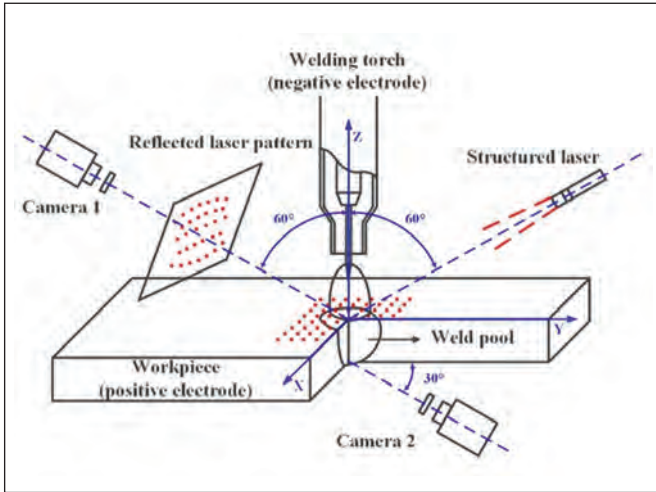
Experimental setup of the weld pool and weld joint penetration system.
